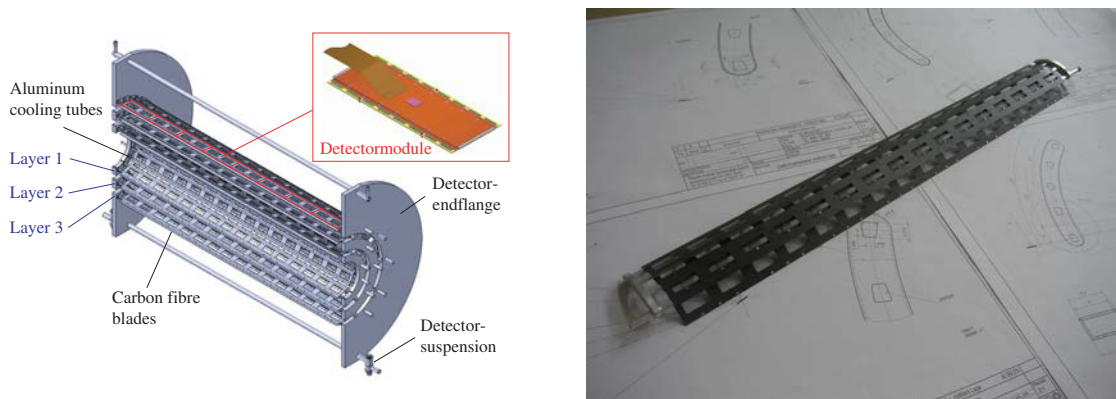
Left: Half shell of the support structure with the three detector layers. Right: Prototype segment. The aluminum tubes are laser welded to the endflange containers that distribute the cooling fluid.
